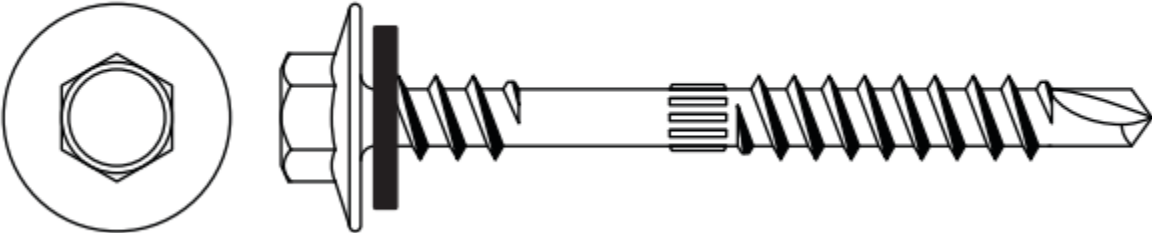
PARTIALLY THREADED FLANGE HEAD DRILLING SCREW WITH CAPTIVE WASHER
